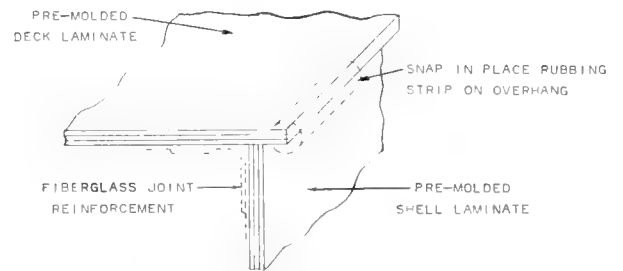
Deck Edge Connection - Modified Butt Joint with Overhang for Snap in Place Rubbing Strip
